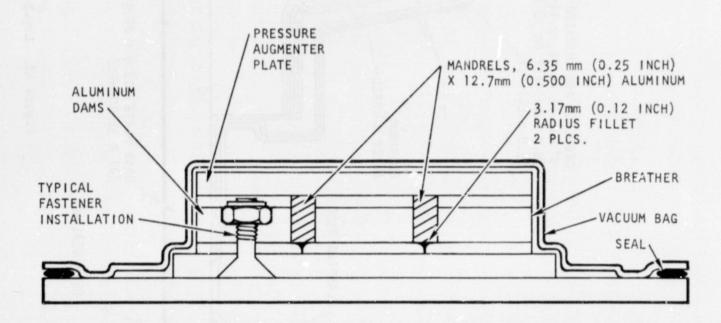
Fillet Radius Stock Tooling and Vacuum Bagging Arrangement - Imidizing Process
